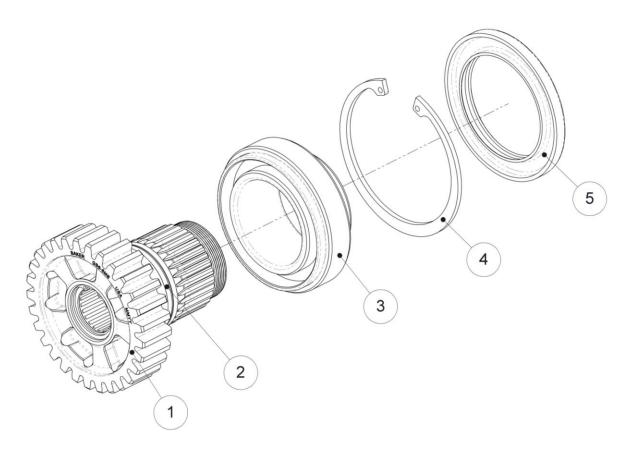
| EXPLODED VIEW, MAIN DRIVE GEAR AND BEARING
